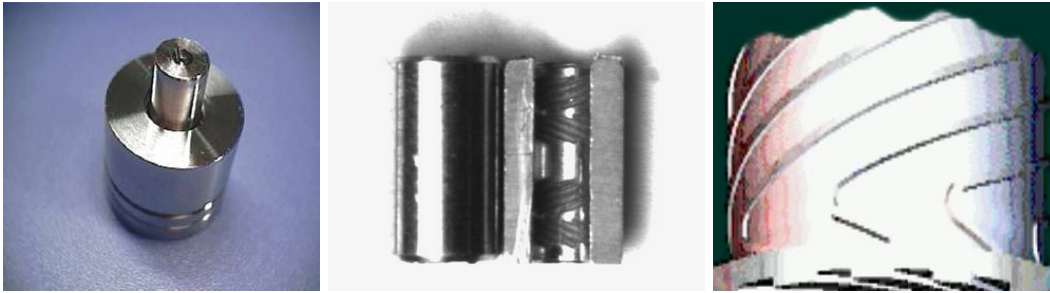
Herring-bone journal bearings, 3 views: (left) full assembly, (middle) cross-section of the journal showing the herring-bone grooves, and (right) a computer-generated image of herring-bone grooves on a bearing.
